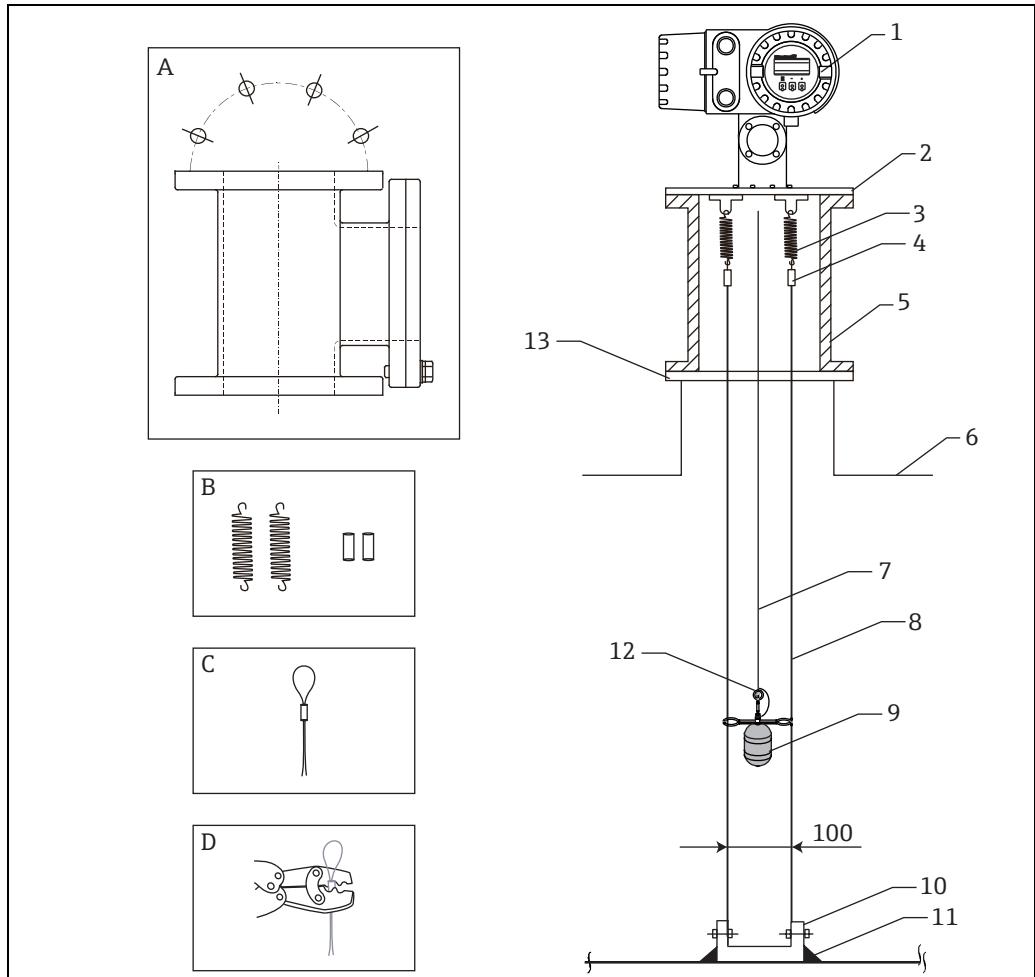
Mounting with guide wire, unit of measurement: mm (in)
